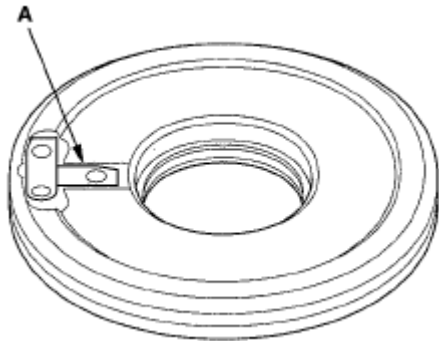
Identifying Clutch Pistons And Clutch Piston Check Valves
